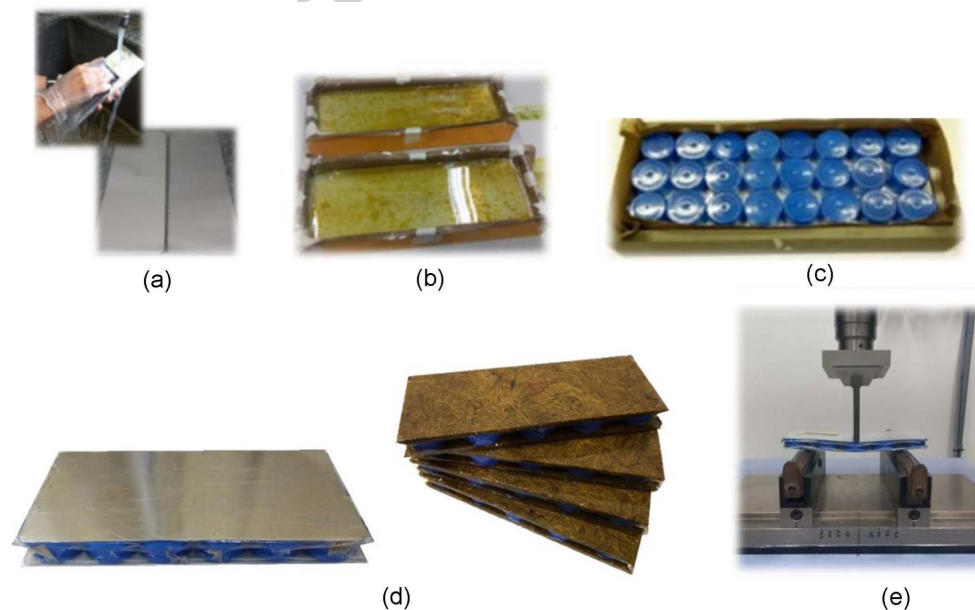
Sandwich panel manufacturing process: aluminium surface treatment (a), adhesive application (b), caps insertion (c), produced samples with aluminium, on the left, and coir fibre skins, on the right (d) and flexural testing (e).
